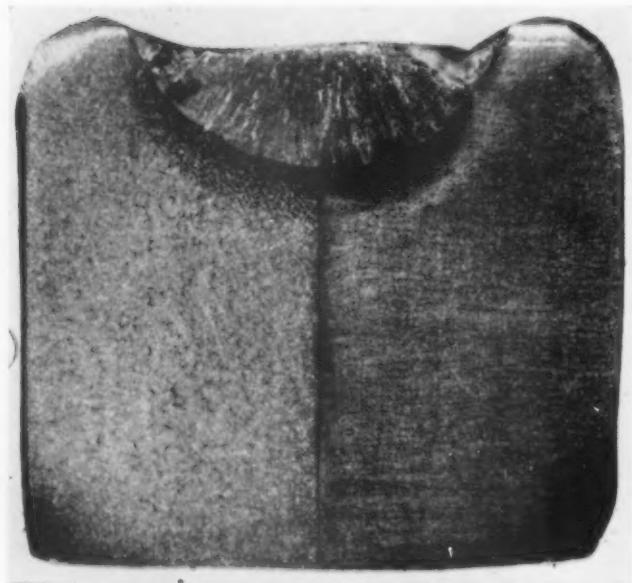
MACROGRAPH OF STEEL CC25 WELDED TO STEEL WSS WITH ELECTRODE 1. BEGINNING OF WELD. NO PREHEAT. MAGNIFICATION: X4.
